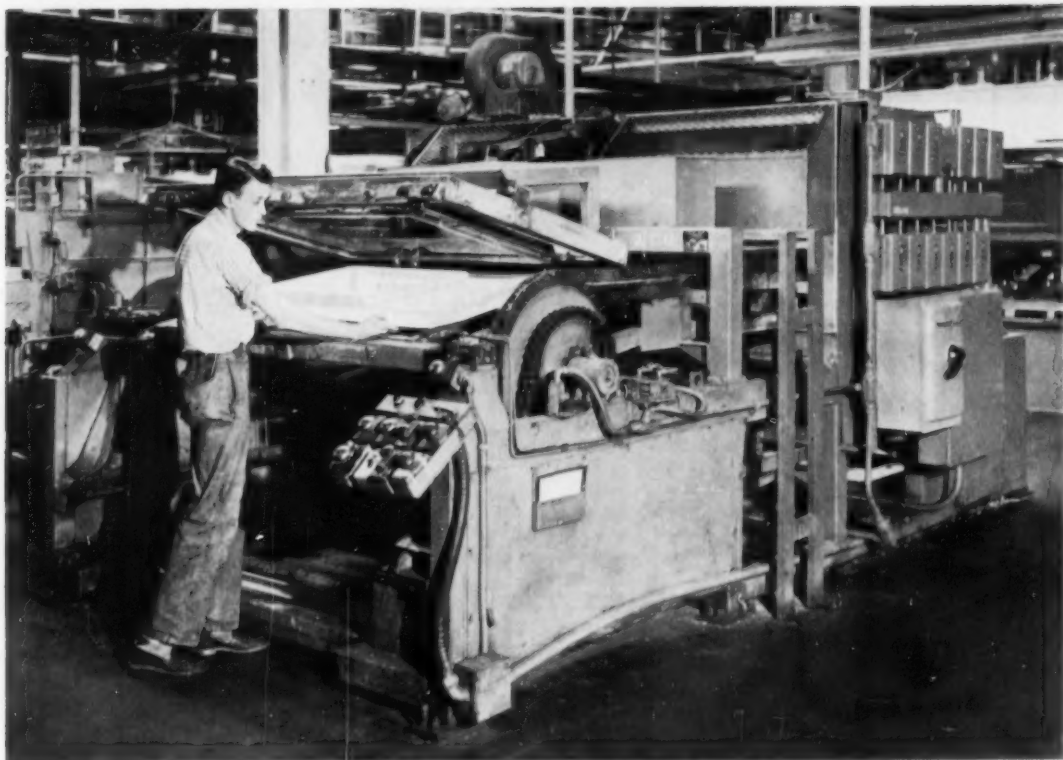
Four-station automatic thermoforming machine in actual operation. (The machine can also be operated manually.) Operator is shown removing a finished refrigerator door liner which he will next swing around into a piercing and trimming press behind him (not visible in above photo). After trimming, he will hang both liner and trim on conveyors. (See Fig. 7, p. 126)
